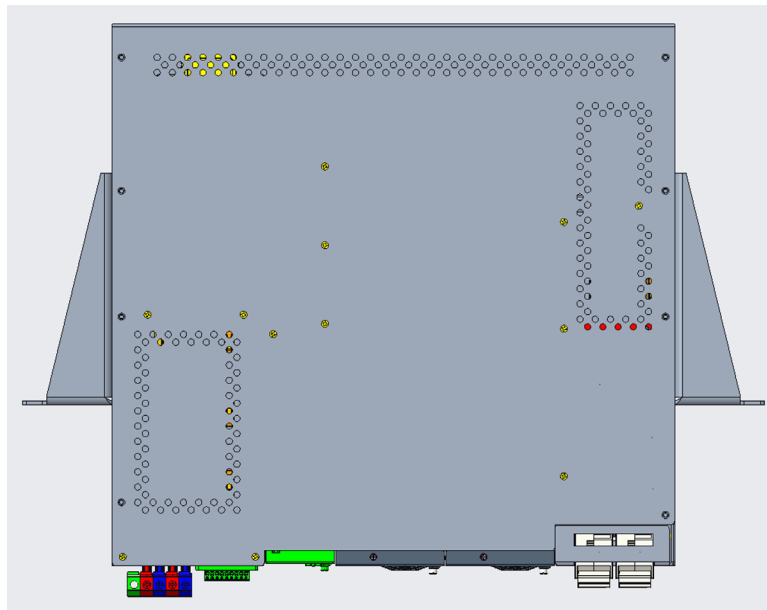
Isometric View Rack Mount: Solar Add-On Shelf with 23-inch Mounting Brackets with 5-inch Recess
